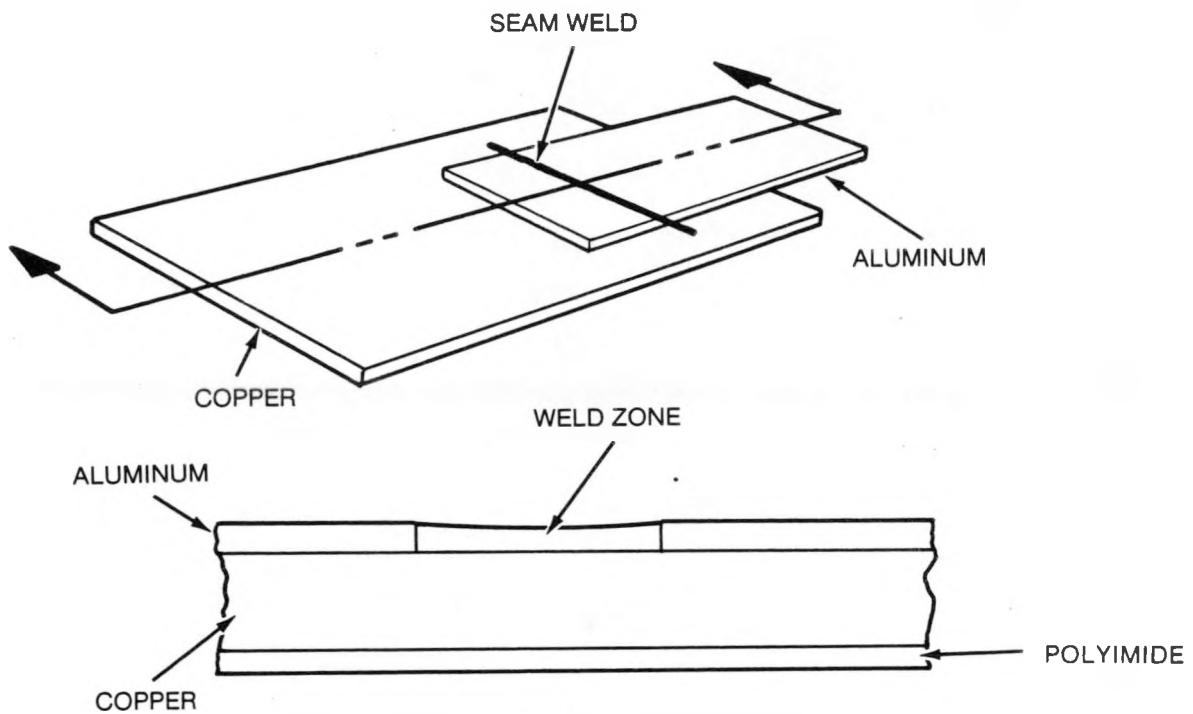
Parallel Gap Seam Weld Cross Sectioning
